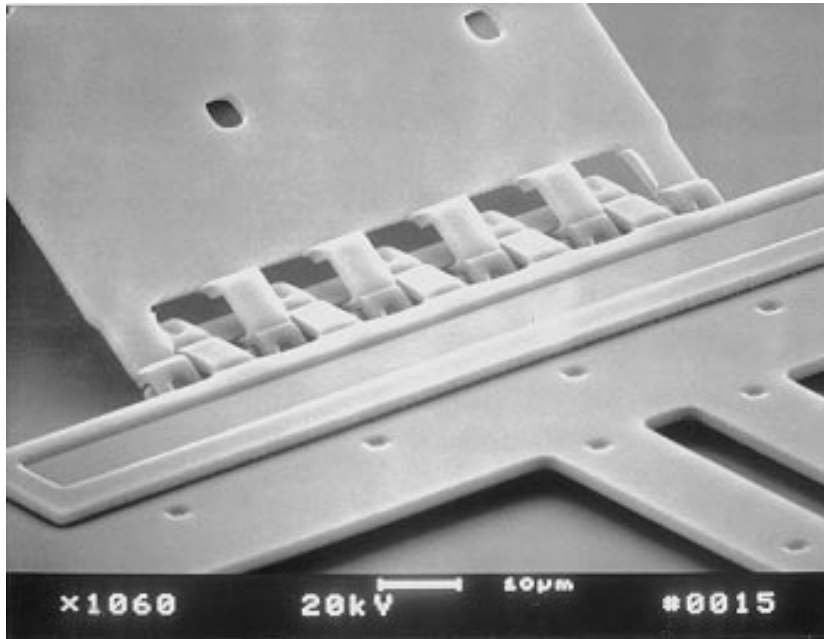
A close-up view of the scissor-hinges which connects the horizontal sliding plate to the angled plate.
